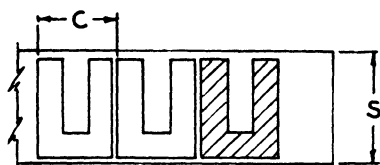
A layout for U-shaped blanks that utilizes only 54 per cent of the strip.
